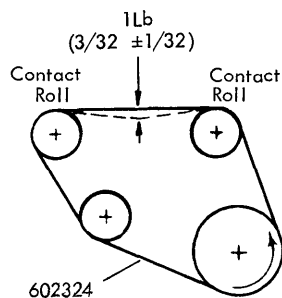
Timing Belt Tension, Punch and Read Feed
